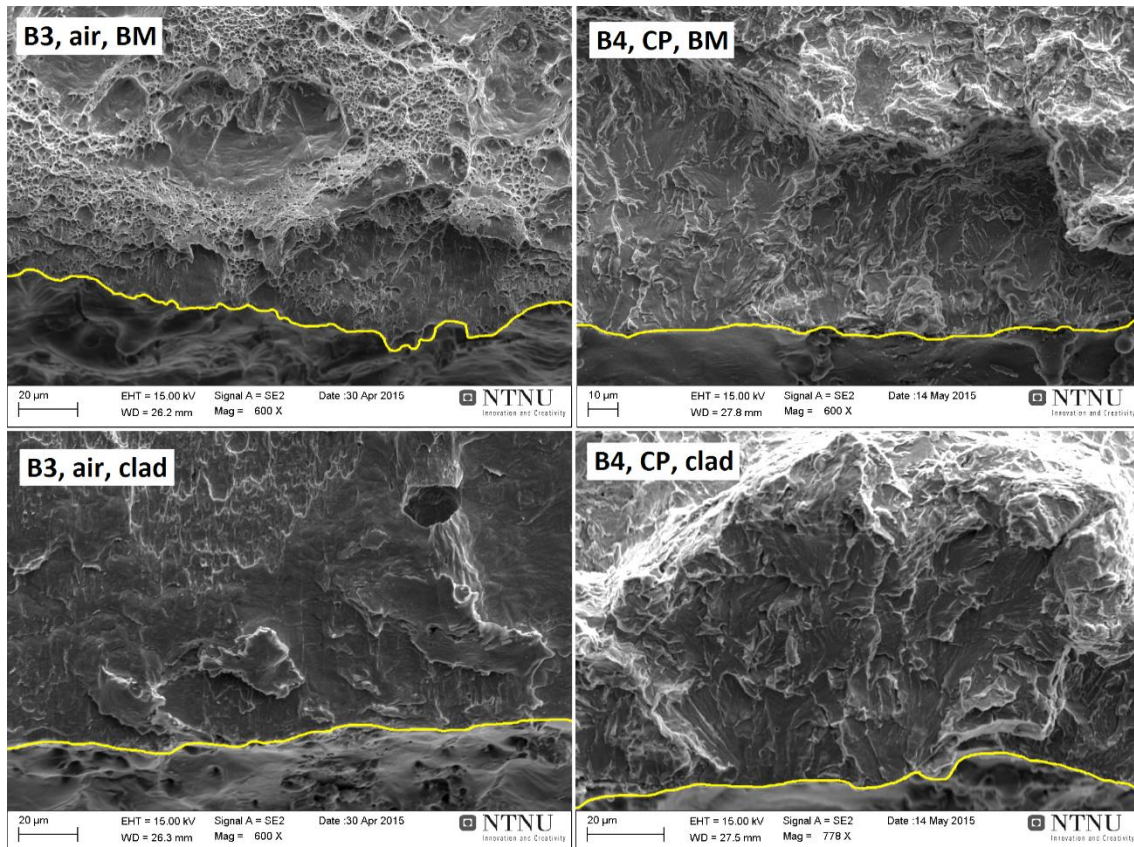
Comparison of fracture surfaces for the clad section of specimen. The image is taken at the center region. The fracture surface is above the yellow line.
